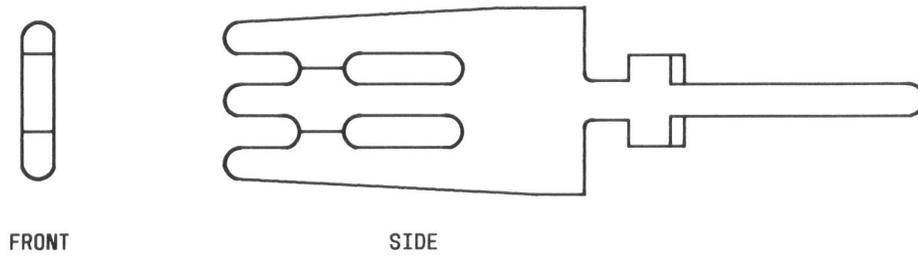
Views of Terminal Used on 112-Type Connecting Block
